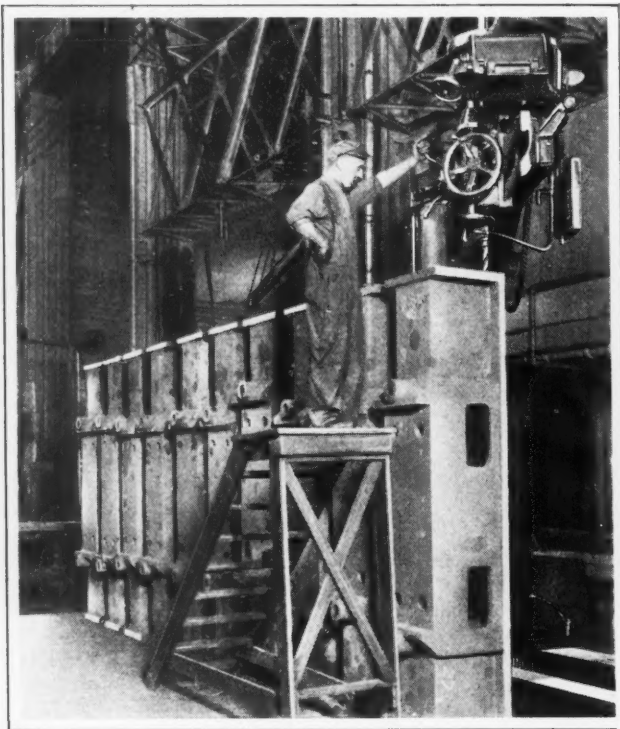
Traveling Radial Drilling Machine Used for Drilling Holes in High Castings
